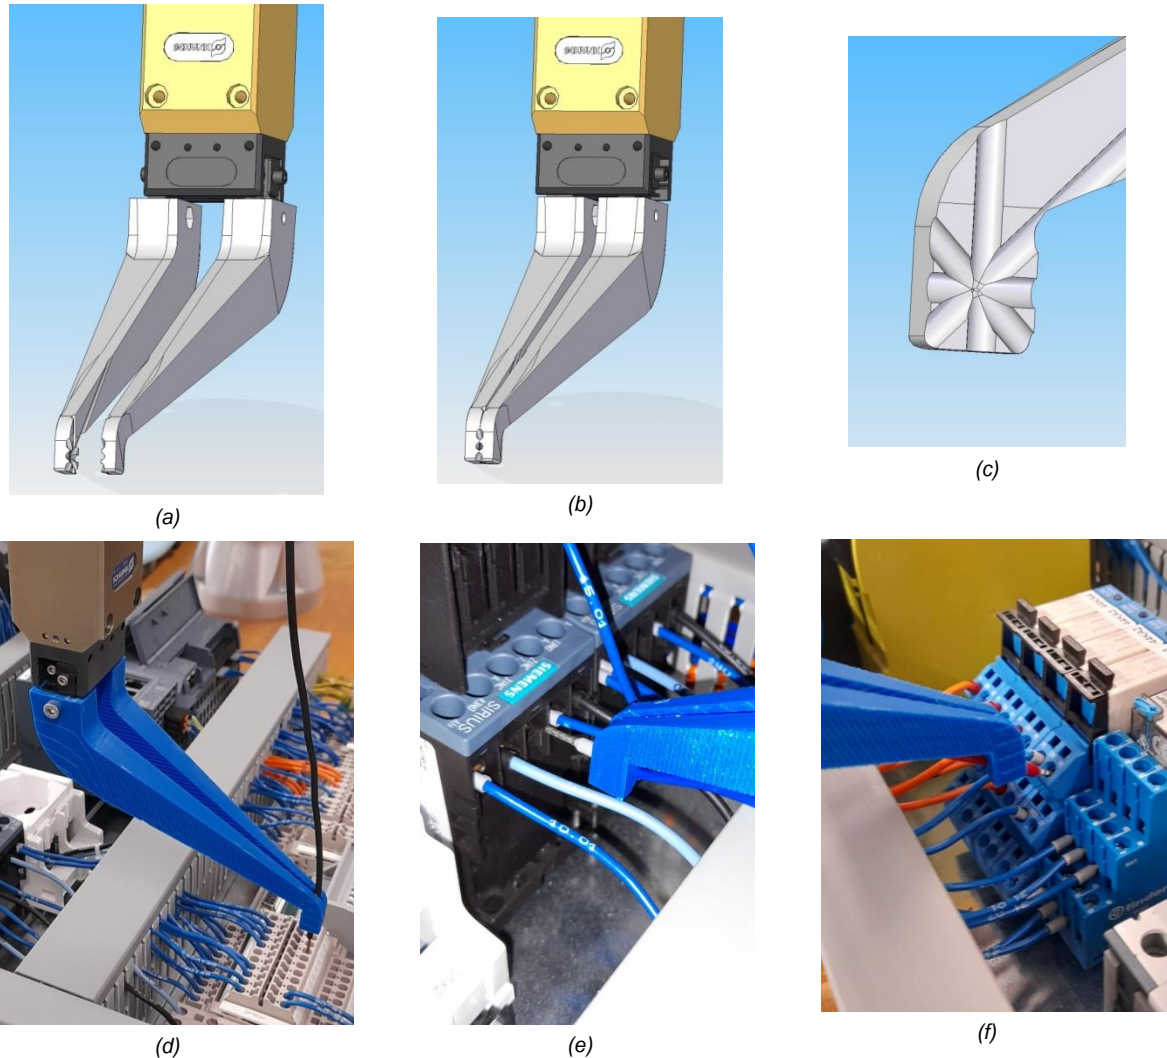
CAD design of the fingers for cable connection in UC1 in open position (a), and in closed position (b), detailed view of the finger pad with grooves for cable holding (c), the finger prototypes inserting a cable in vertical direction (d), horizontal direction (e) and at 45 degrees (f).
